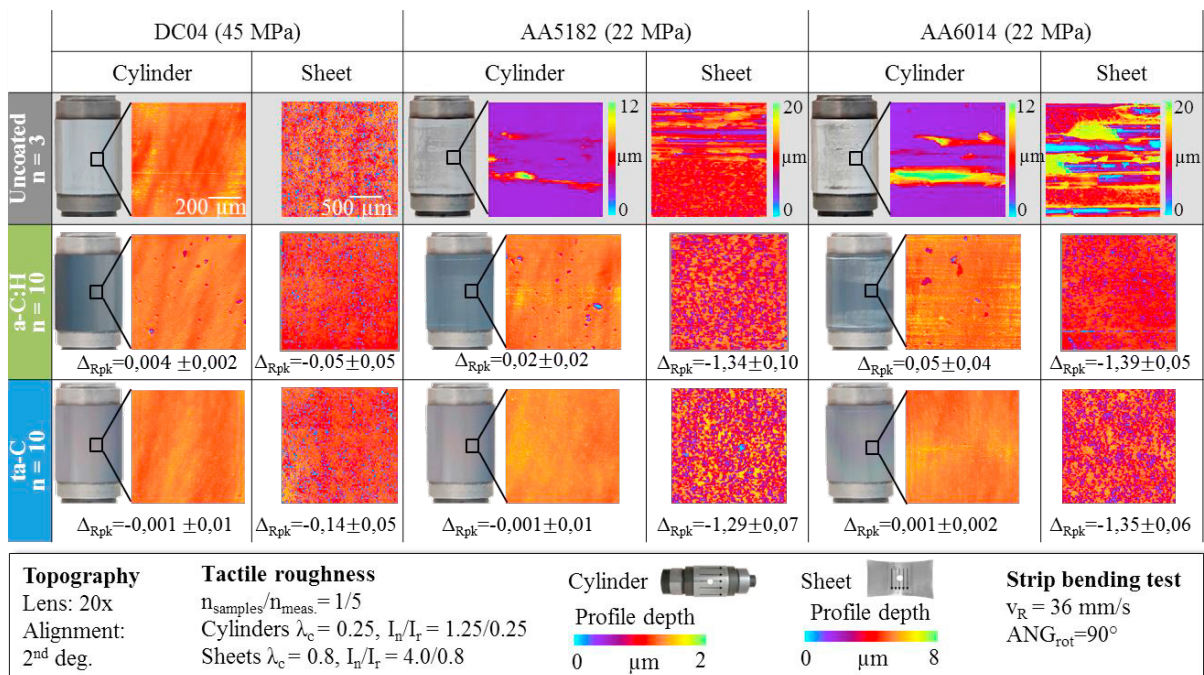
Tool and sheet surfaces after strip bending rotation test.
